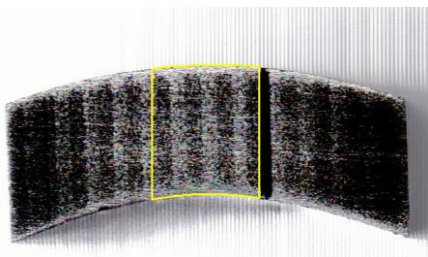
Test arrangement for the corner and welding coupons.
